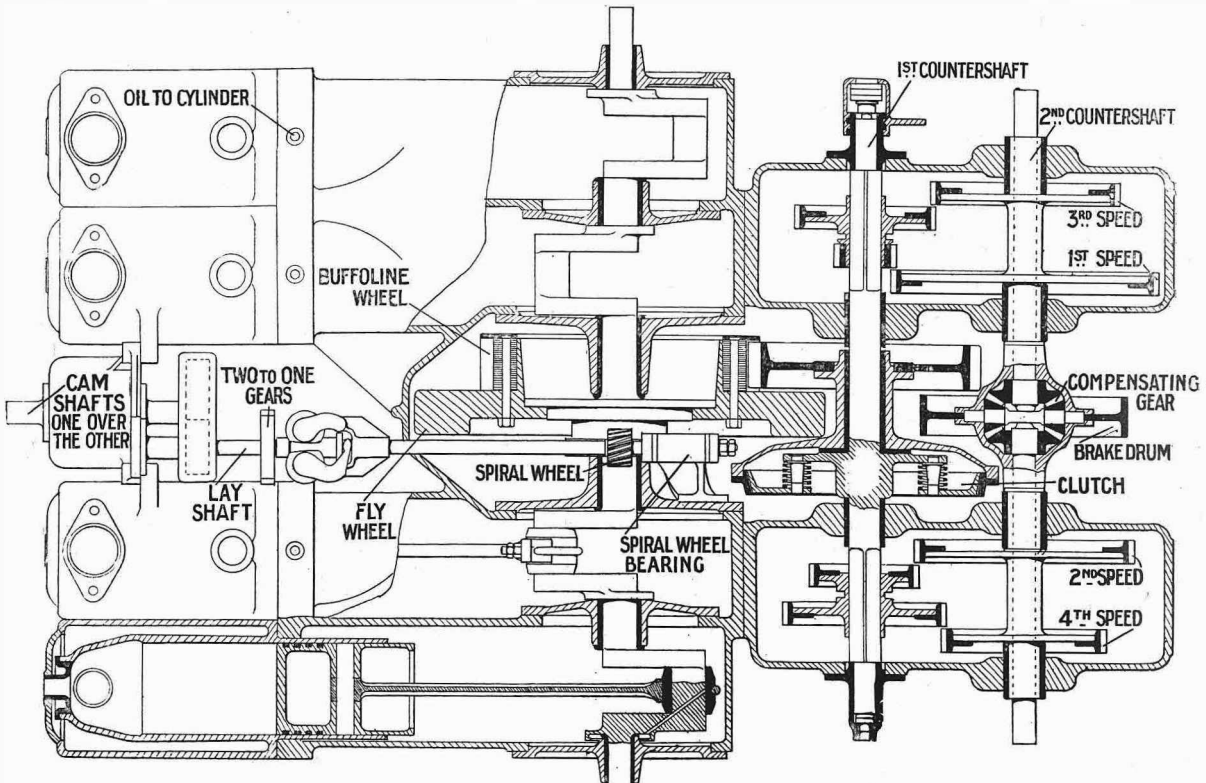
Part sectional plan of the 12 h.p. James and Browne engine and transmission gear
